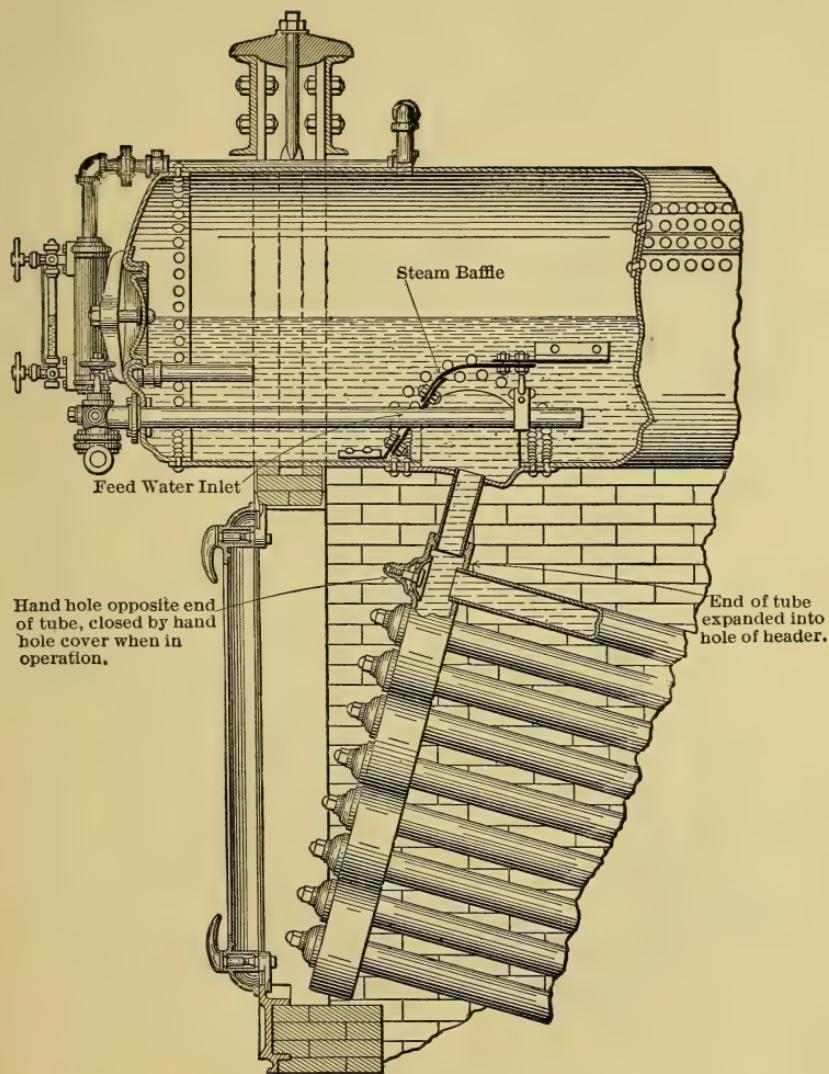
Details of Babcock & Wilcox Boiler Construction.
